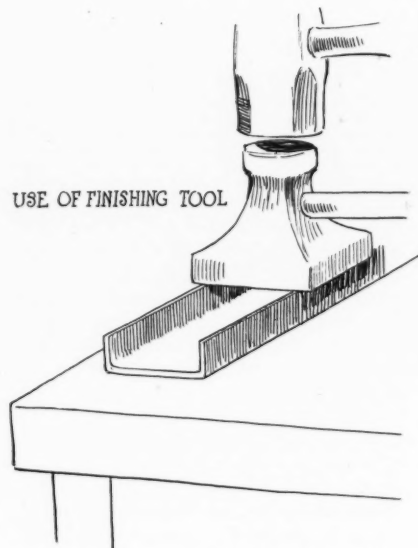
A cross member being straightened with the finishing tool on the straightening table. A heavy sledge is used
